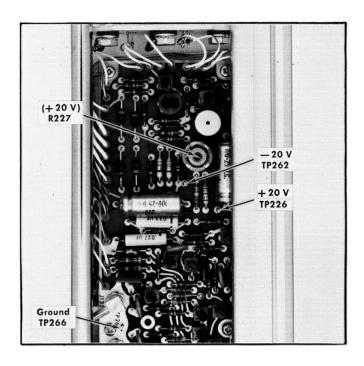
Power supply test points, Pulse Generator circuit board.
